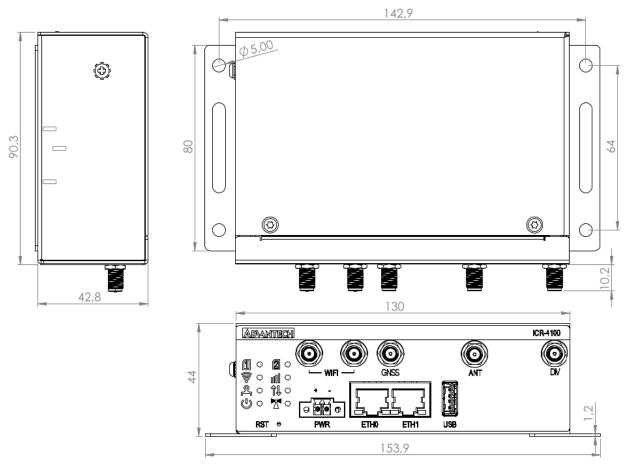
Router Dimensions - Front, Top and Right view with Wall Mounting holder
